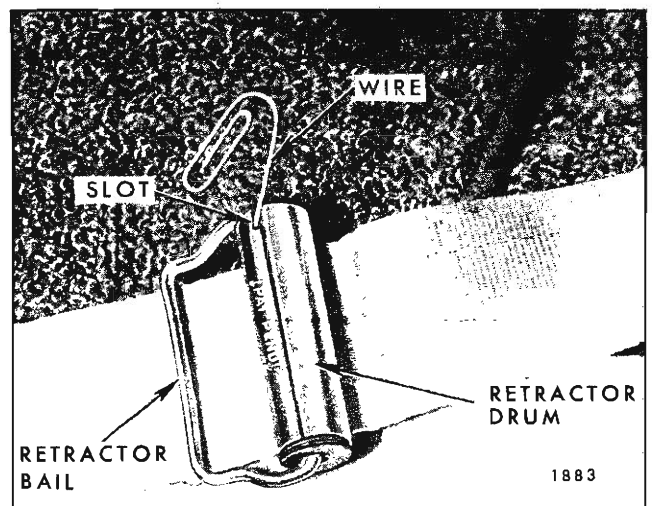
H8—Locking Seat Belt Retractor Drum Spring
